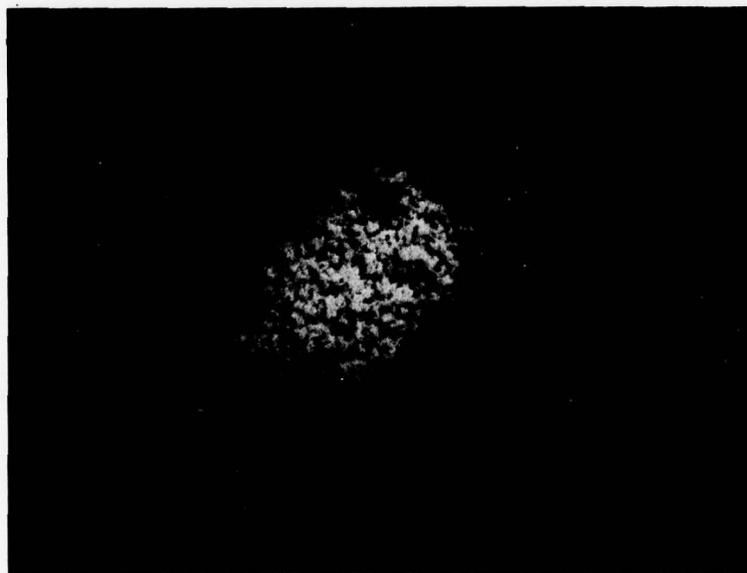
FRACTURED COATING AT THREE POINTS PROBED WITH STAINLESS STEEL POINT INDICATING THE FUSED AND BRITTLE CONDITION OF THE COATING. MAG. 15X
